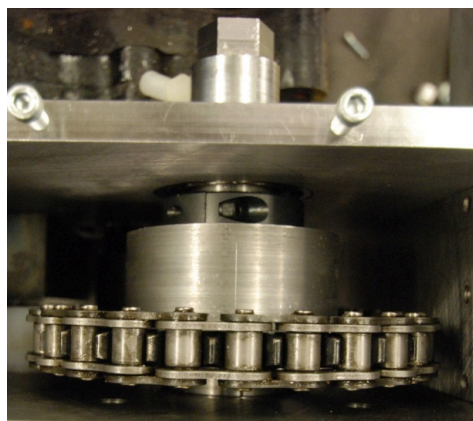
Upper Shaft Assembly (as viewed from above)
